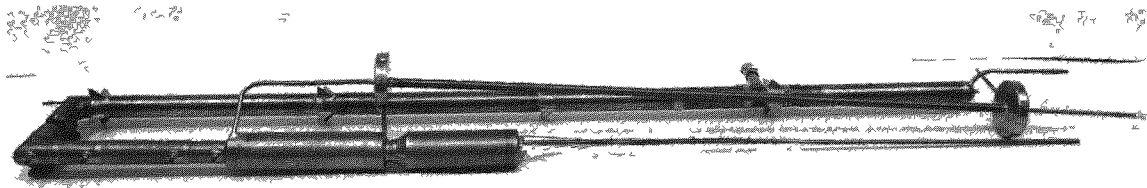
Boiler and Condenser Legs of D-43 Loop FCL-8 Before Completion of Final Butt Weld.
